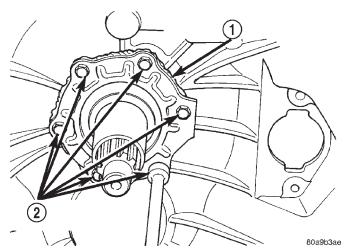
Input Shaft Bearing Retainer Bolt Removal— Typical
